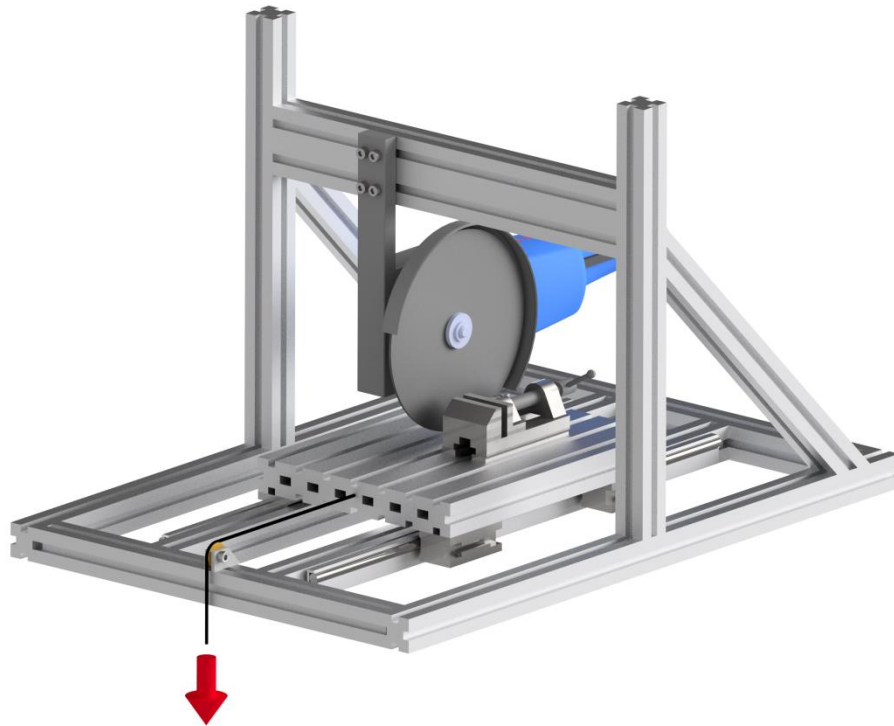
Abrasive cutting test device. For easy handling, the test samples can be fixed in a bench vice, which is attached to the machine table. The machine table is horizontally movable due to the linear guidance. A force indicated by the red arrow is realized by a constant weight. Test sample is clamped into the bench vice in the downright position of the machine table. Then the attached weight force pulls the sample by the full length through the cutting blade.
